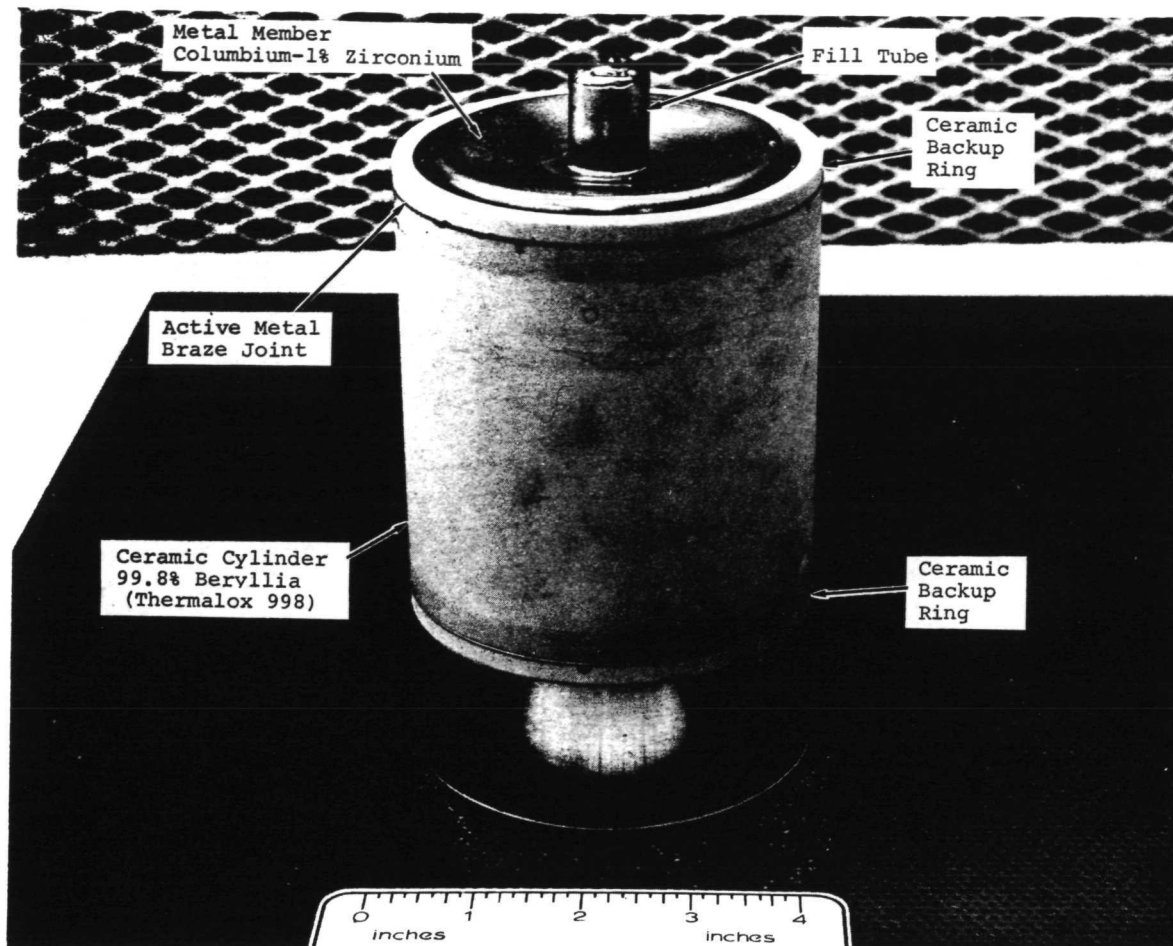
Assembled 4-Inch-Diameter Bore Seal Capsule
